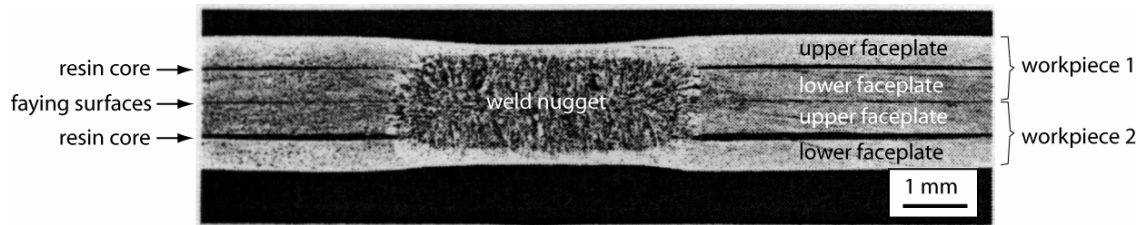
Cross-sectional view showing the weld nugget of conductive type vibration damping steel sheets (VDSS). Spot welding was performed at 8 kA for 200 ms and electrode force of 2.5 kN [126].
